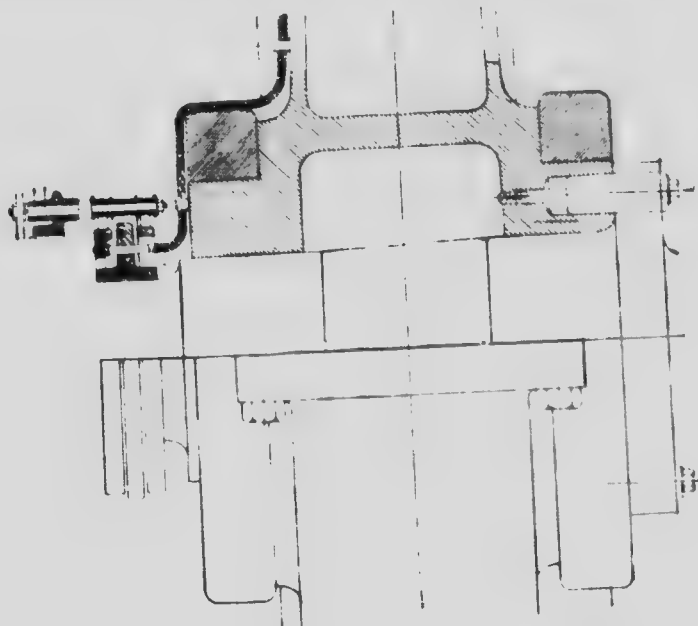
Clamping of Hub of Brush Alternator on Shaft.
